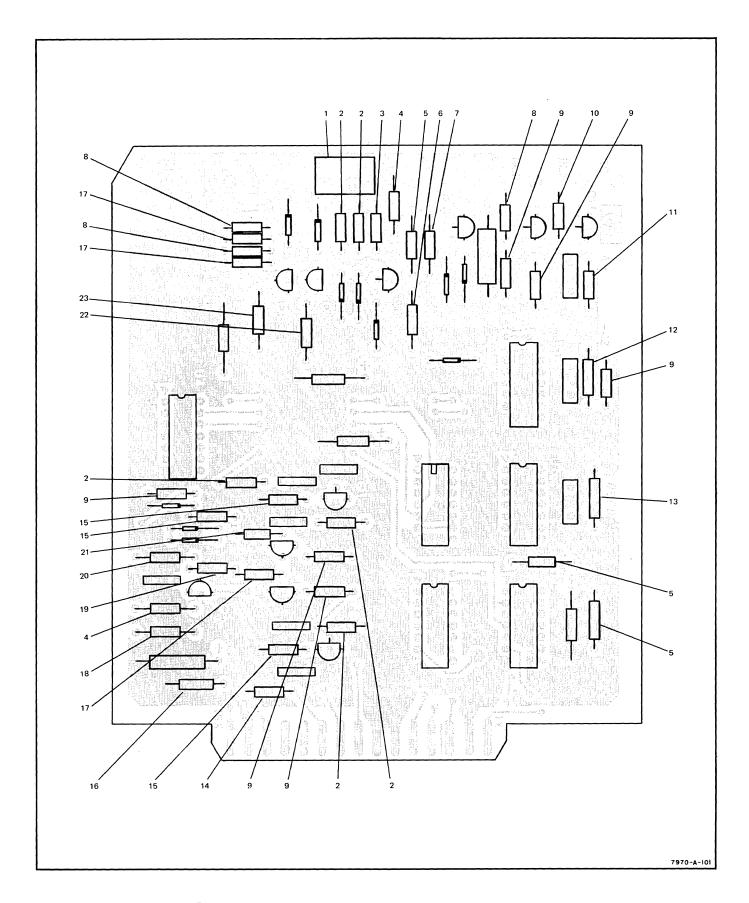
Read/Read Control PC Assembly A18A1 (Sheet 1 of 2)
